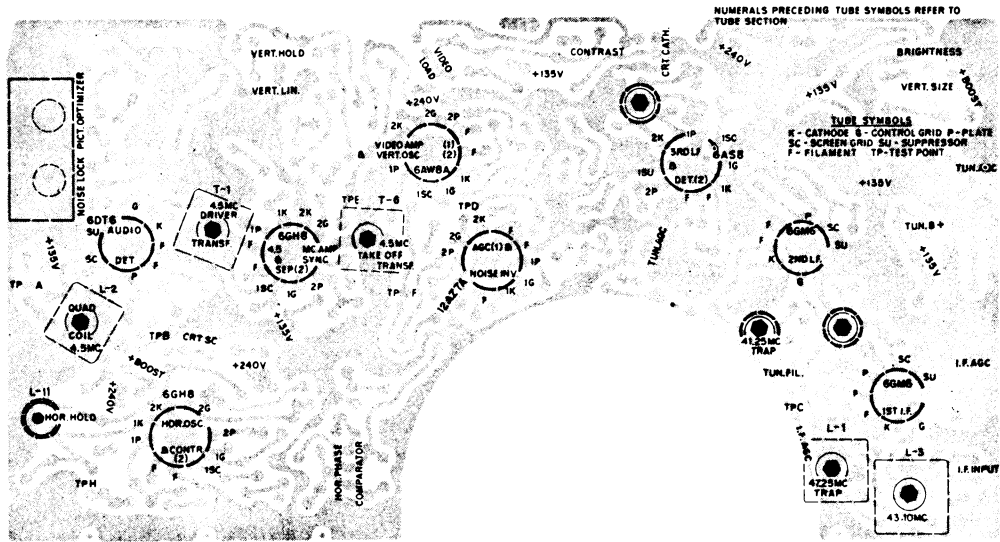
ETCHED PRINTED CIRCUIT BOARD (BOTTOM VIEW).
